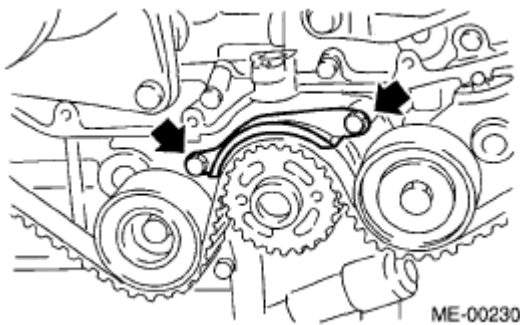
Locating Timing Belt Guide Mounting Bolts
